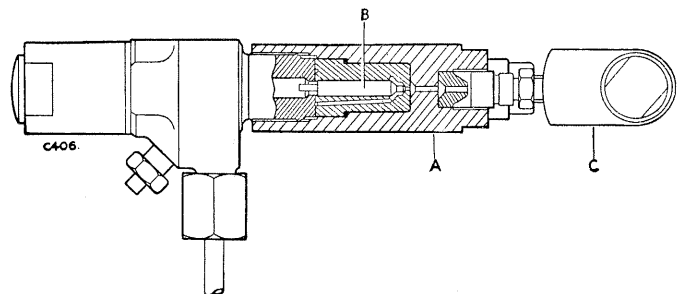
Sectioned view of adaptor (C.A.V.-E.T. 872)
